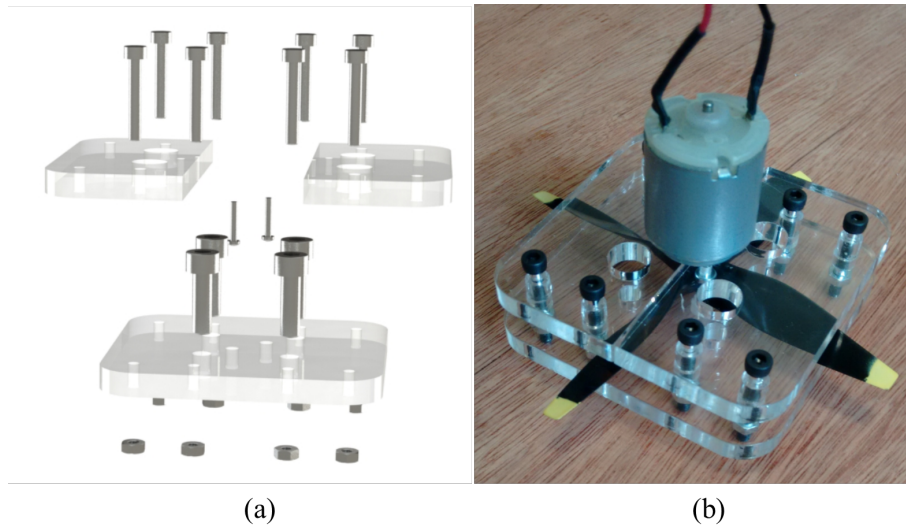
(a) Exploded view of CAD model of the jig to attach the motor and propeller to the robot arm. The bottom plate screws to the wrist of the robot, the top two plates go around the motor shaft and clamps down on the propeller. Two small screws go upwards through the top plates into the motor housing and prevent it from rotating. (b) A photograph of the assembled jig, this can then be attached to the robot's wrist with four bolts through the bottom plate.
